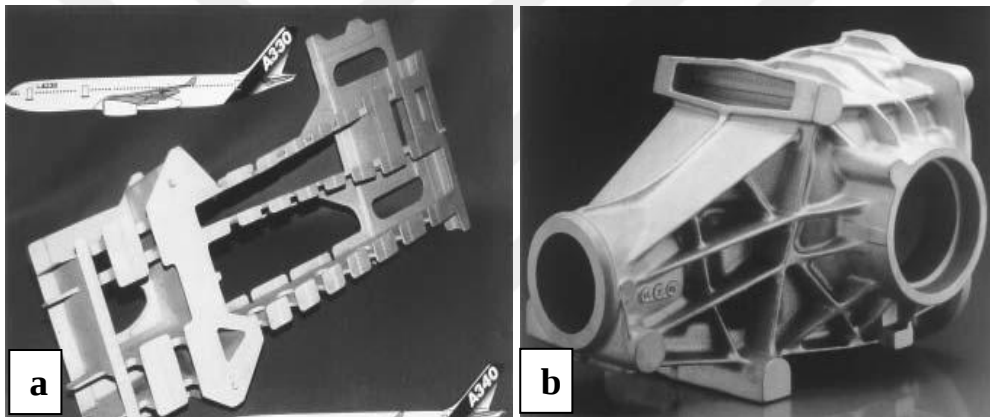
a) Turbo frame A356.0-T6 b) 380.0 alloy automobile real axle housing
